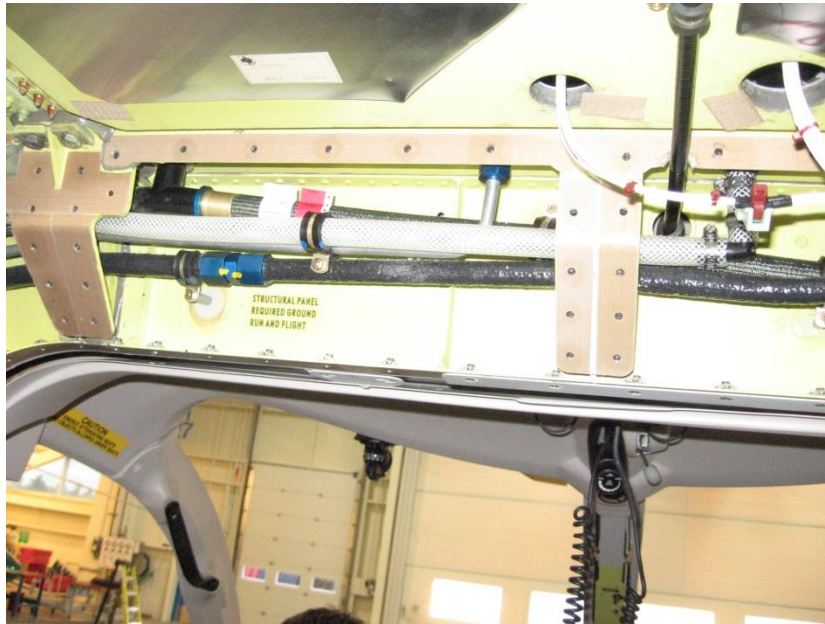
Drain Hose routing in overhead and lift frame showing clamping arrangement
